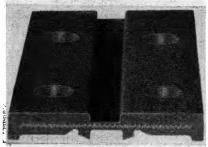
Rubber cold-cabinet-lid hinge cut to show cross-sectional construction involving a fabric reinforcement.
